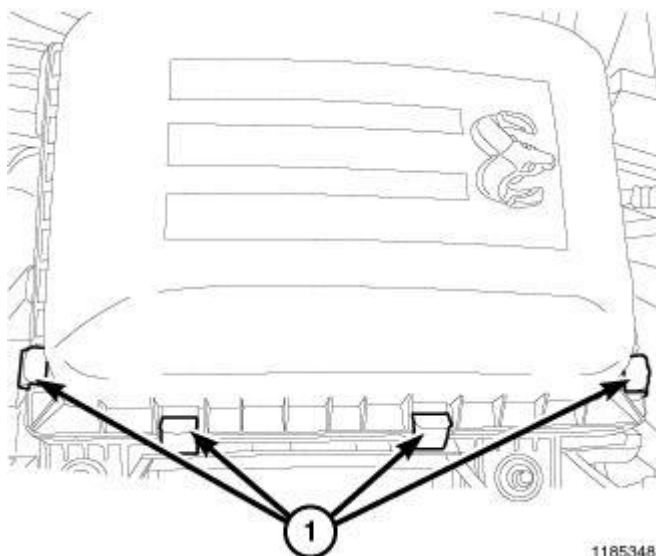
Air Cleaner Body Cover Retaining Clamps
